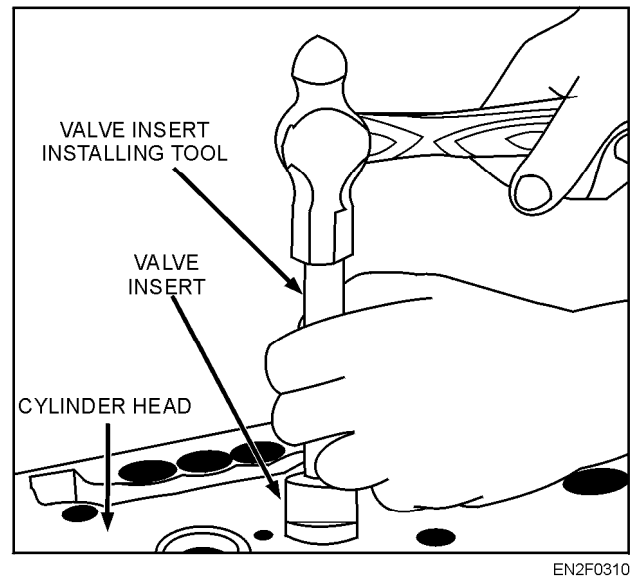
Driving a valve insert into the cylinder head counterbore.
